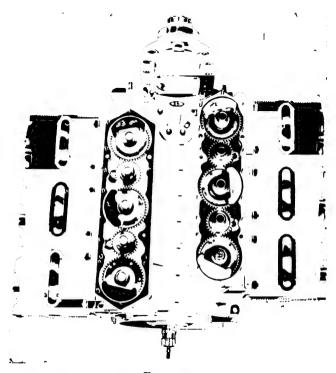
Plan view of Rotol six-cylinder horizontally opposed flat-six air-cooled engine with semi-rotary sleeve valves.
